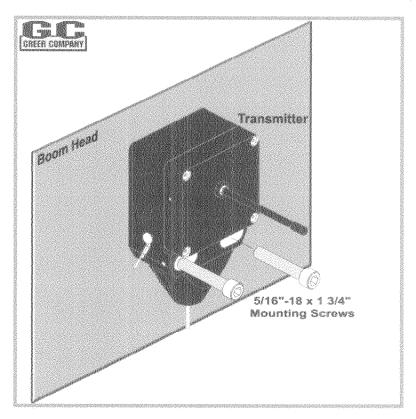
MOUNTING TRANSMITTER DIRECTLY TO BOOM HEAD
